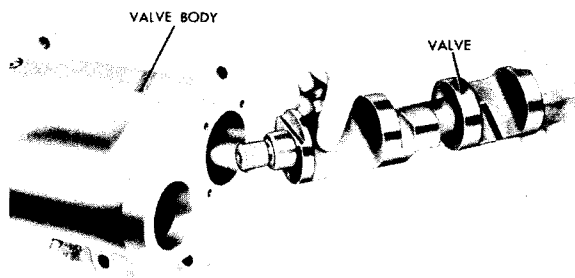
Removing (or installing) the hydraulic brake valve in the brake valve body
